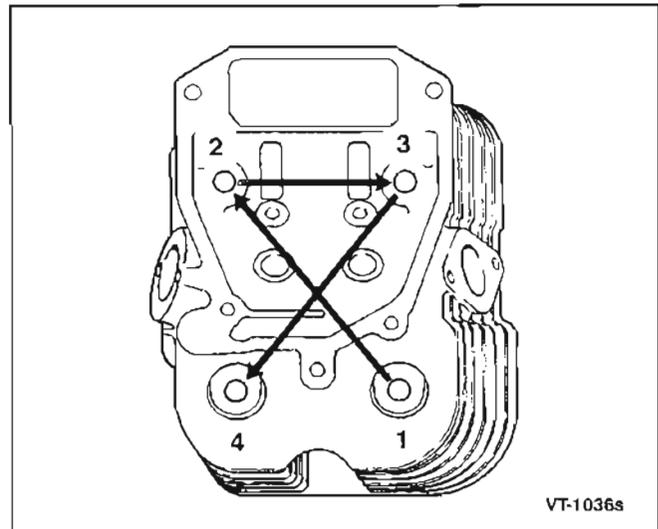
CYLINDER HEAD TIGHTENING SEQUENCE
